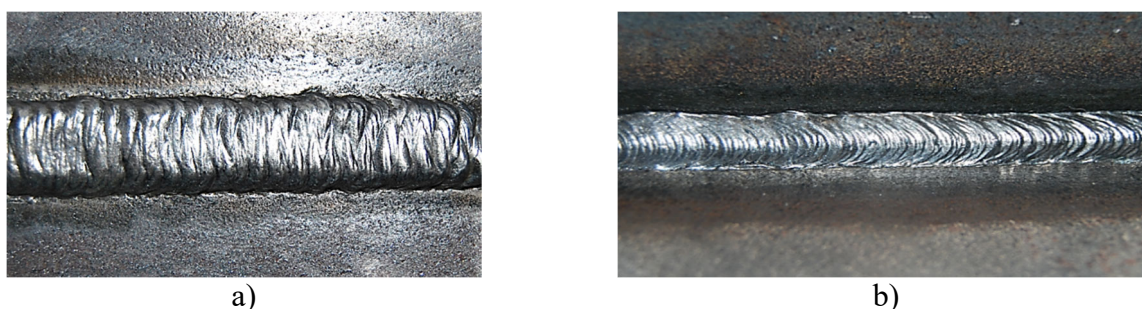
Outer appearance of butt weld (a) and fillet weld (b) joints in welding positions: a) - overhead; b) – horizontal-overhead.
